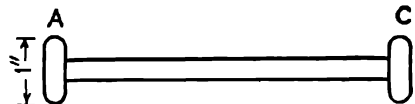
SIDE VIEW OF BOARD-LOOM.
